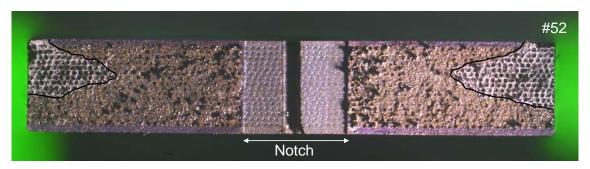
FCG Specimen Fracture Surface Exhibiting "Reverse Tunneling" with Crack Front Profile Highlighted
